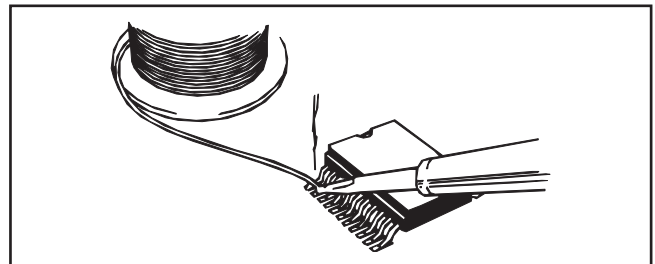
When removed, clean the pads with desoldering braid.
